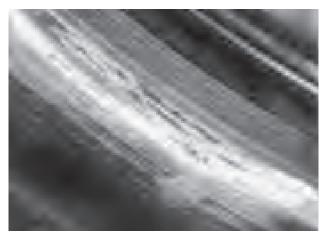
Corrosion on Outer Ring Raceway of Deep Groove Ball Bearing
